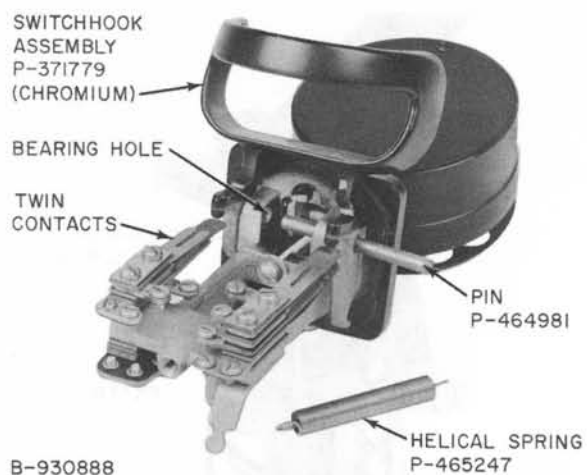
G-Type Handset Mounting, Switchhook Assembly
